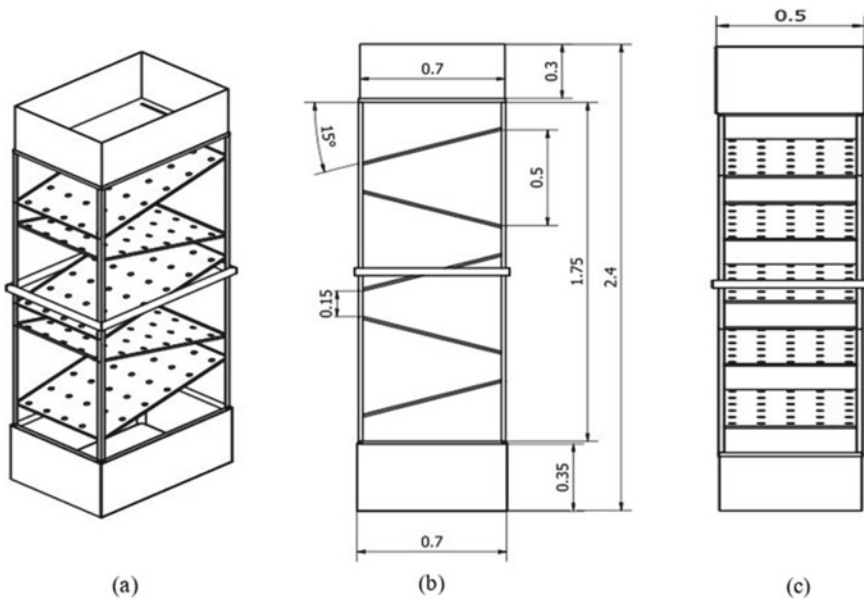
a Three-dimensional cooling tower, b side view of cooling tower and c front view of cooling tower
